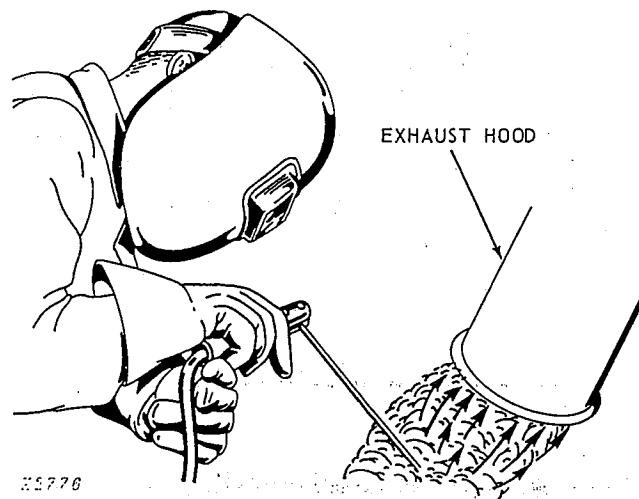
Welding Areas Must Have Ventilation
